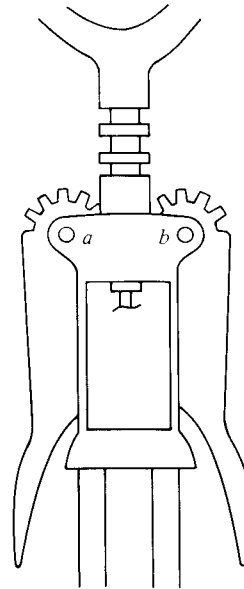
A typical two-eared geared corkscrew shown immediately after pulling a cork. The bottle is shown sketchily, and the cork and screw are not shown.
